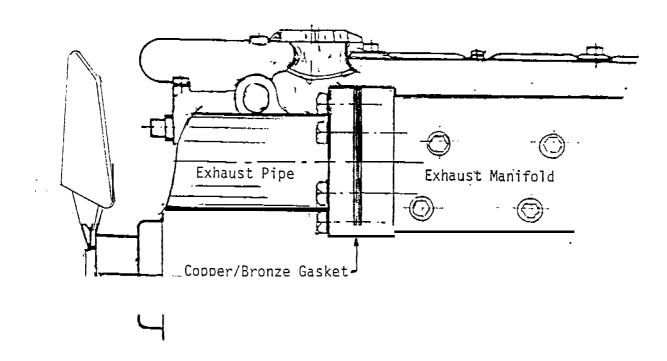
Gasket Between Exhaust Pipe and Exhaust Manifold Flange
